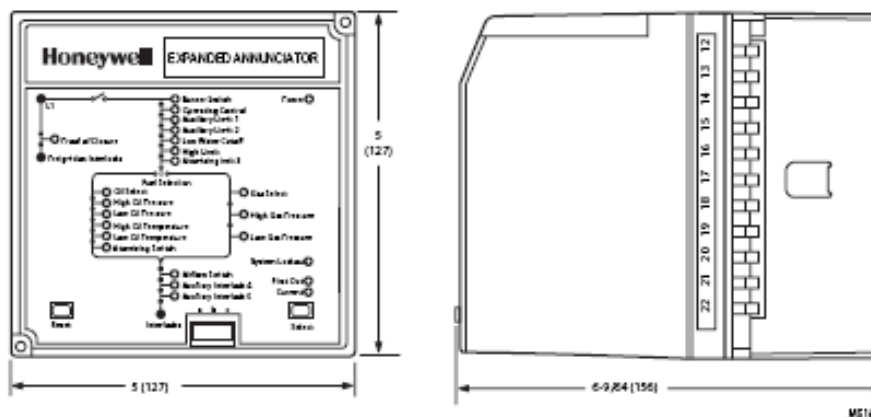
Mounting dimensions of S7830 Expanded Annunciator and Q7800B Wiring Subbase in. (mm).
